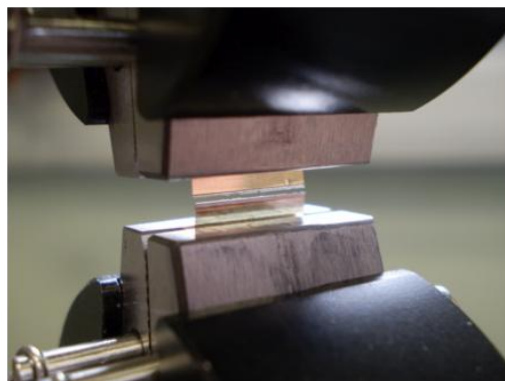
Close-up view of a tested sample (the weld in the center).
